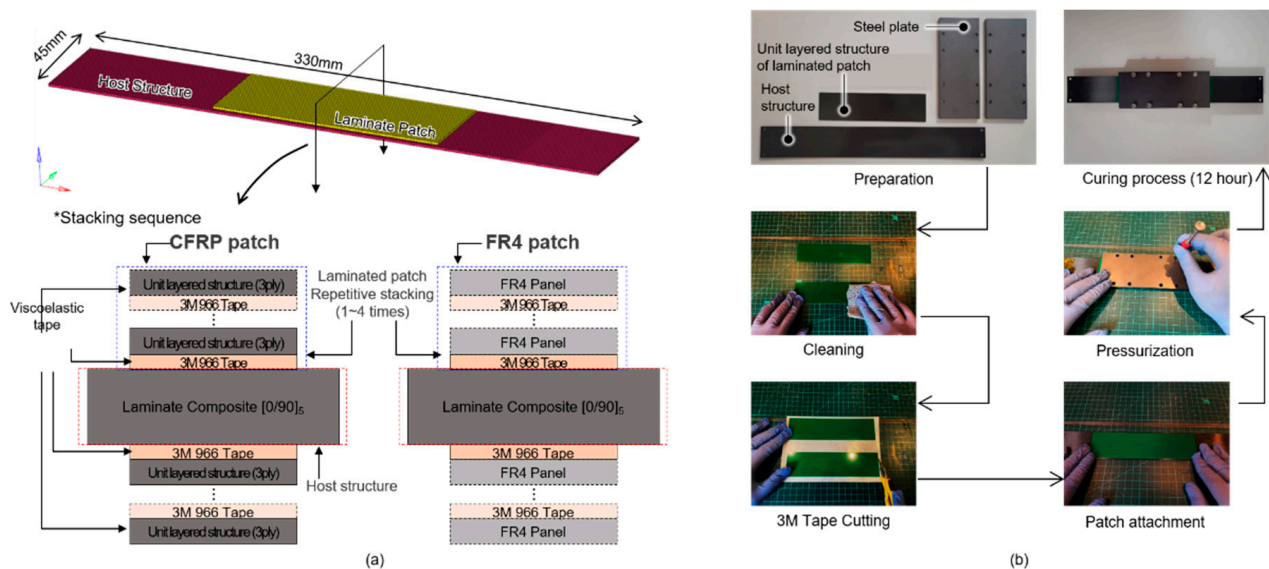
Fabrication process of CFRP-based patch: (a) dimensions and configuration of the specimen; (b) hand layup process for CFRP-based patch.
